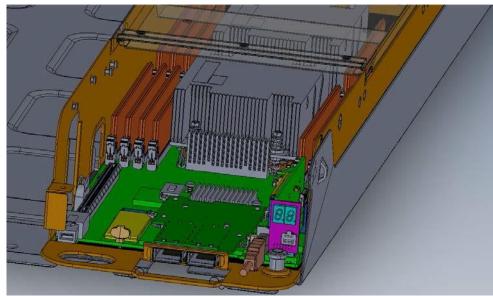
3D View of Mezzanine Card installed in OCP Chassis - Example
